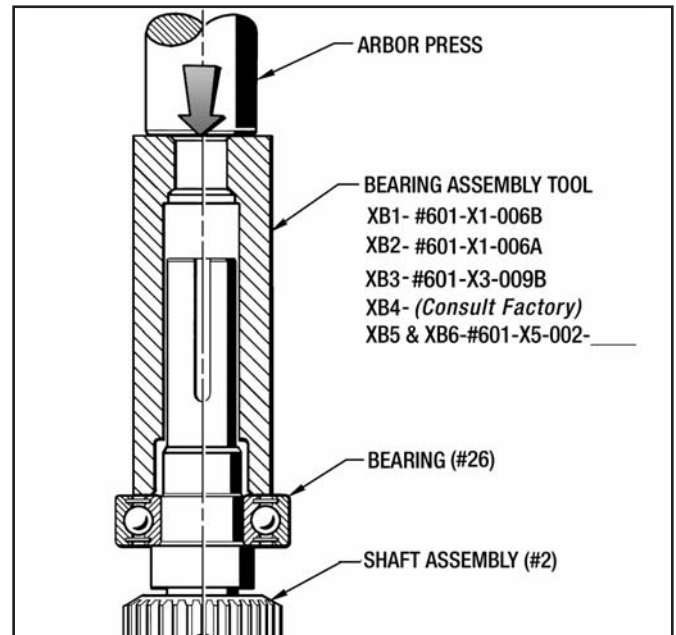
Installing Bearing (#26) in a Coupler Brake
